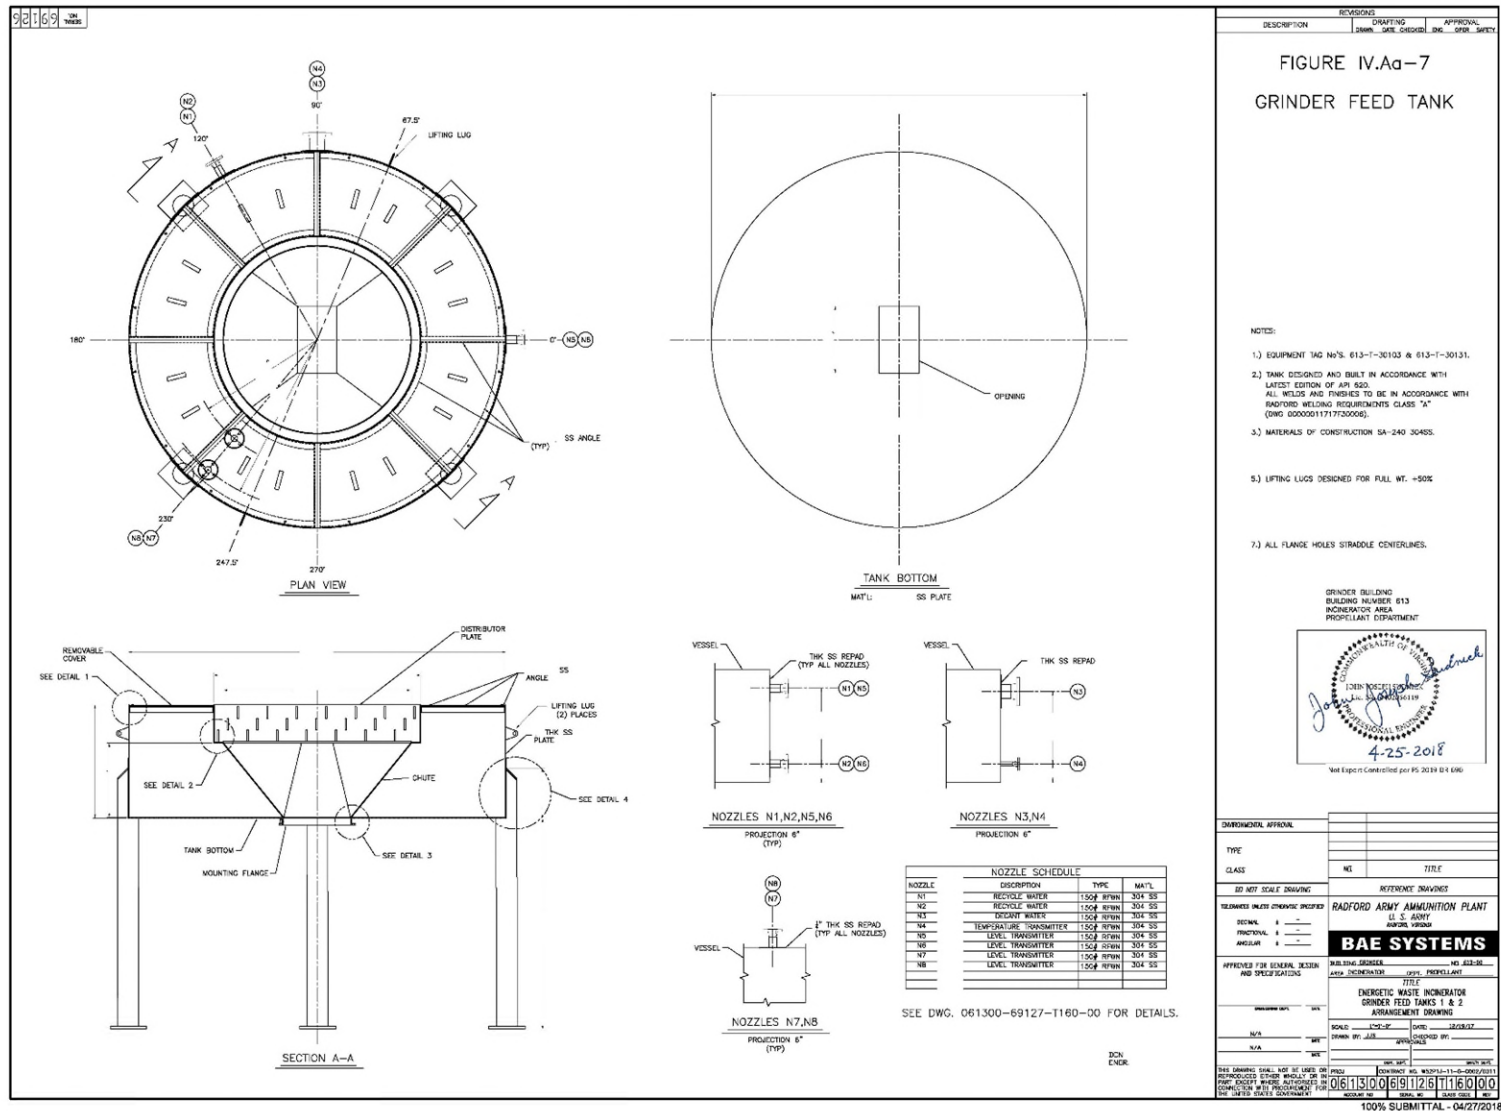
Grinder Feed Tank Engineering Drawing (DWG No. 061300-69126-T160-00)
